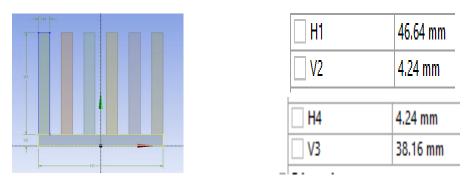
Electronic Chip and Fins with Dimensions Extruded 46.64 mm in positive Z direction
